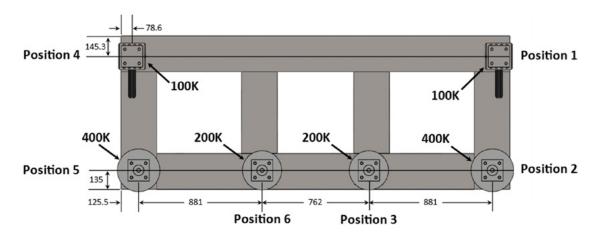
SD660 End Frame Attachment to the Mounting Frame
